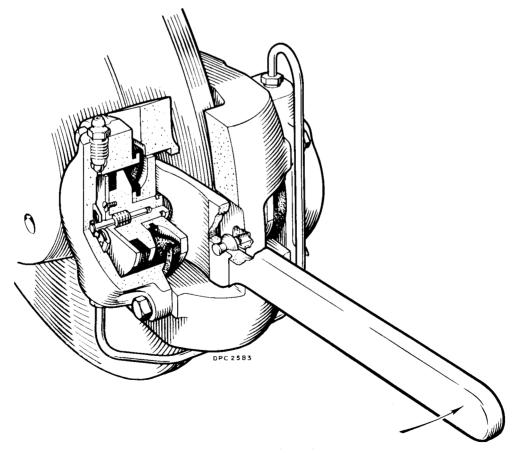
Re-setting the pistons with special tool. (Part No. 7840).
